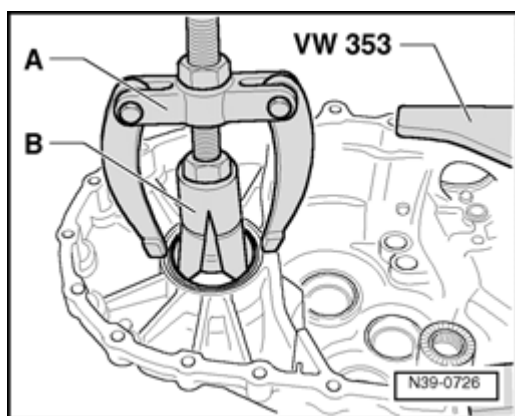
Pulling tapered roller bearing outer race out of transmission housing
